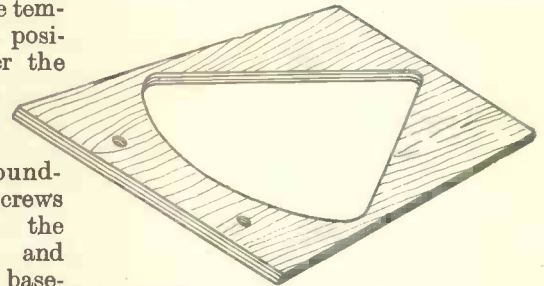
The template for cutting out the openings between the spokes of the disc.
